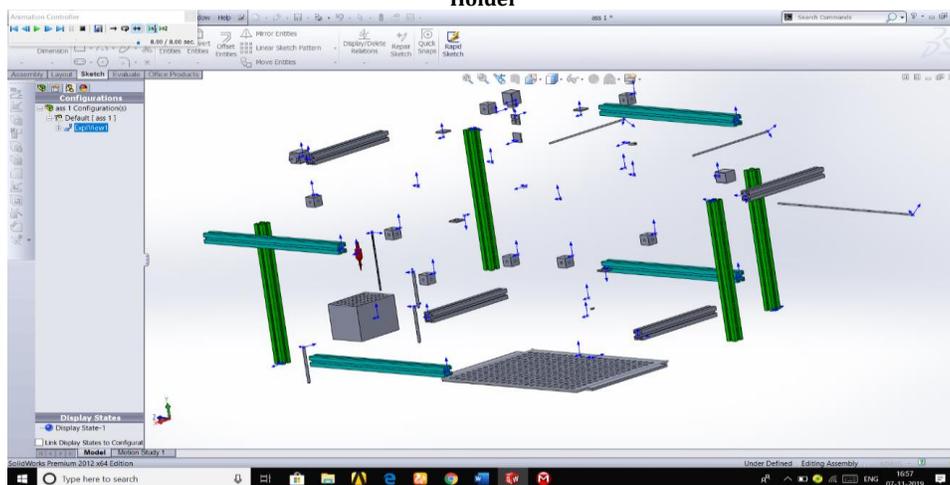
This is the blast view of the system in which we can see each and every component that we used for the designing of the machine
